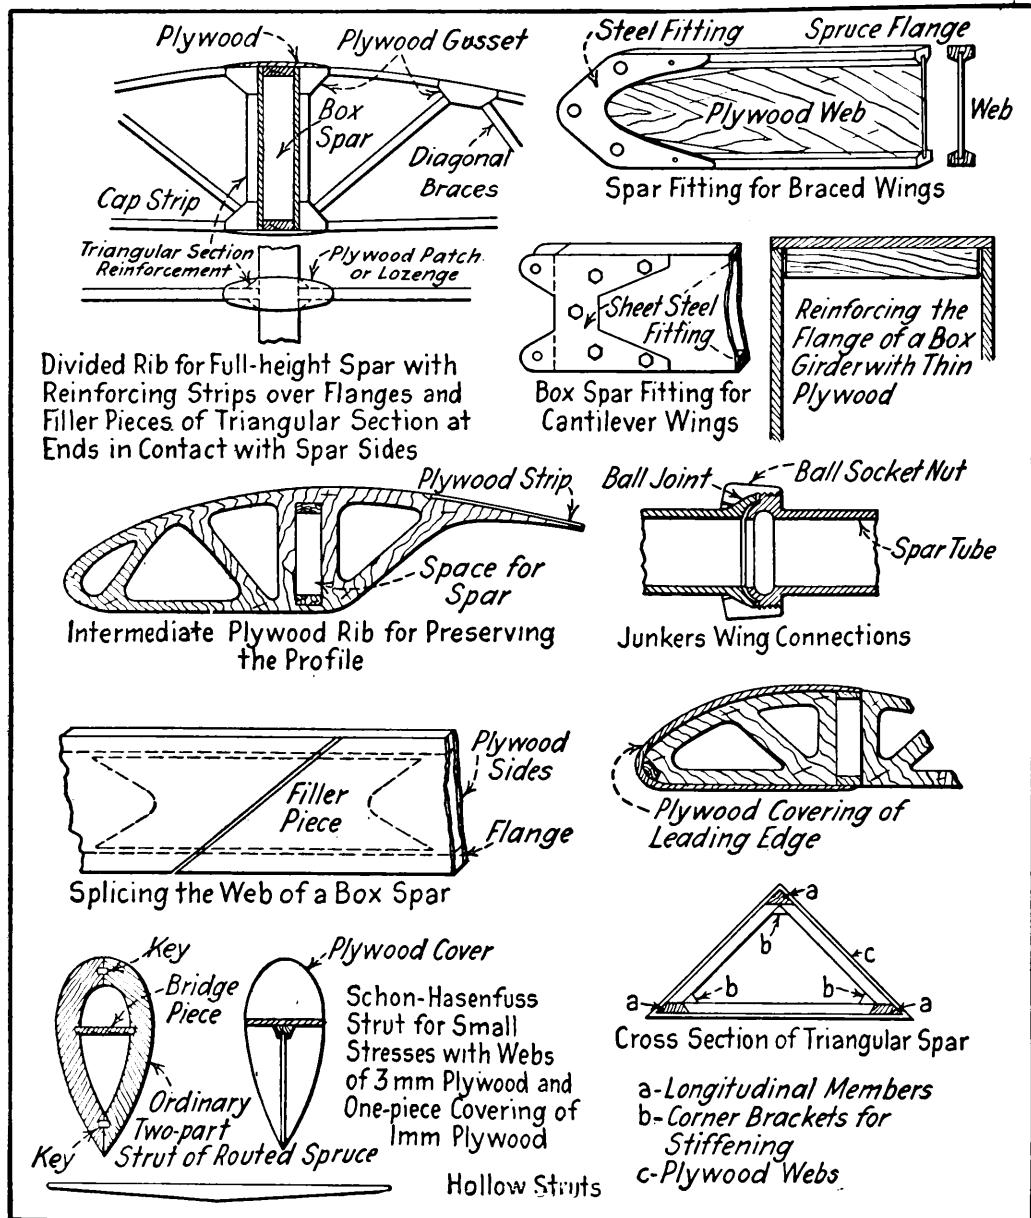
Group of Details Outlining Sailplane Wing Construction Showing Spar Attachments to Fuselage; Method of Splicing Web of Box Spar; Use of Plywood Covering of Leading Edge; Section of a Triangular Wing Spar and Two Forms of Lightweight Interplane Struts.
